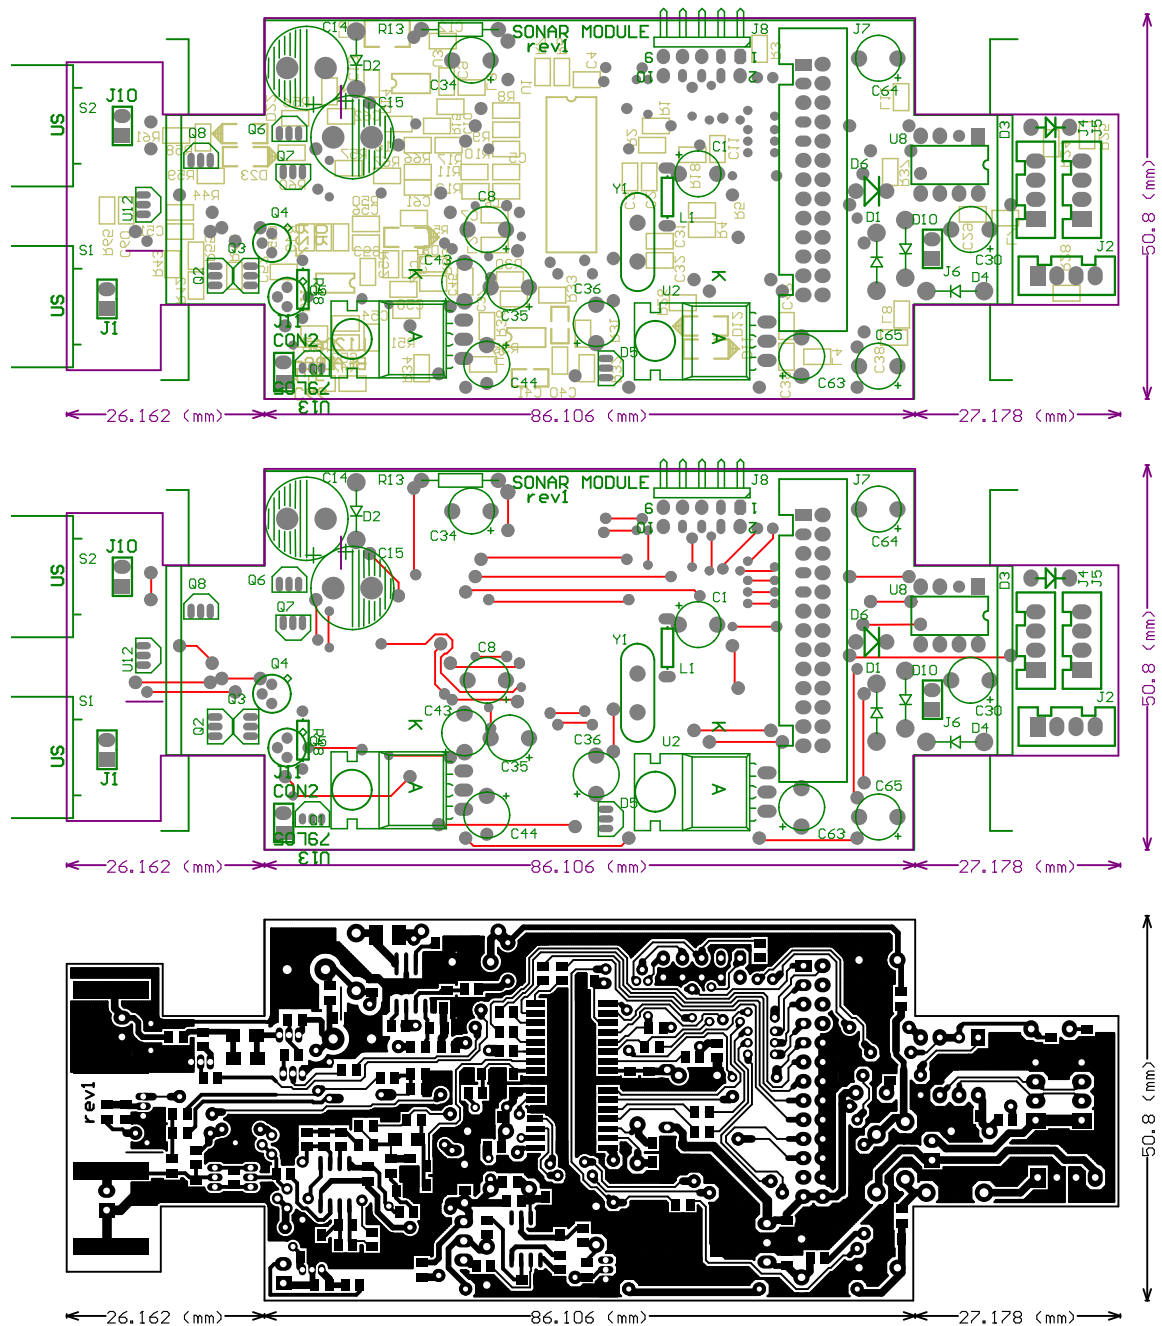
Sonar Module Mainboard - CAD design snapshots - top & bottom overlay; top layer & top overlay; bottom layer
